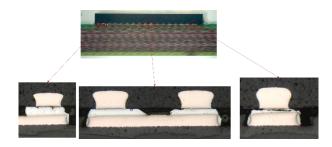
Cross-section of SAC305 soldered QFN64 package (9x9 mm) with solder fillet (EMC = 7 ppm/°C)
